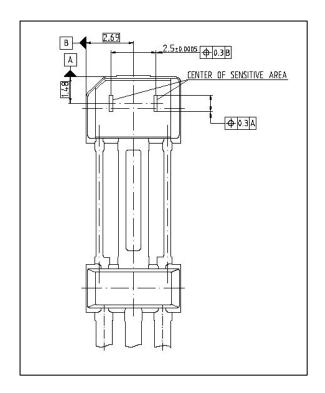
Hall probe spacing in the P-SSO-3-9 package
